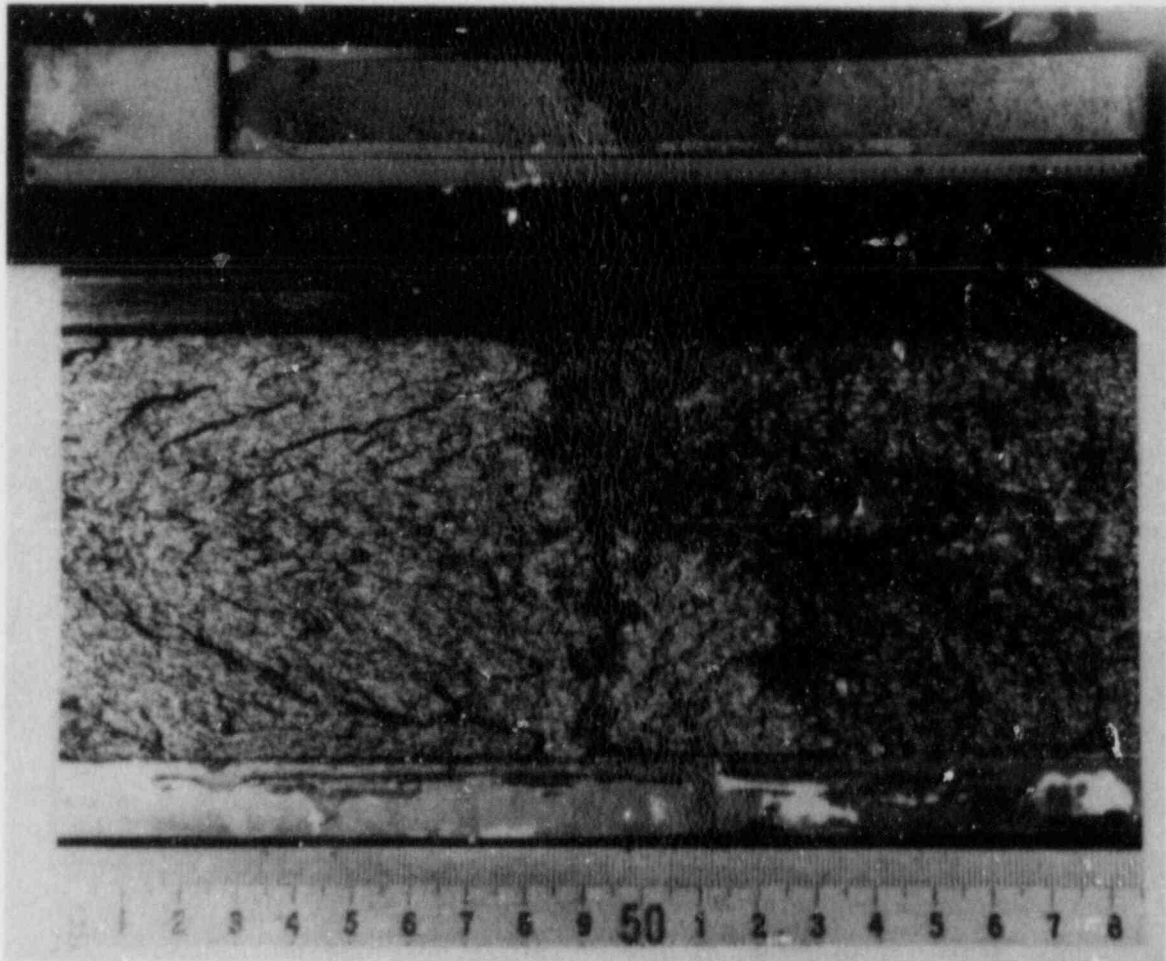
Fracture surface for HSST wide-plate test WP-1.3 showing nearly planar arrest front followed by small amount of tearing and segment of cleavage reinitiation before unstable tearing.
